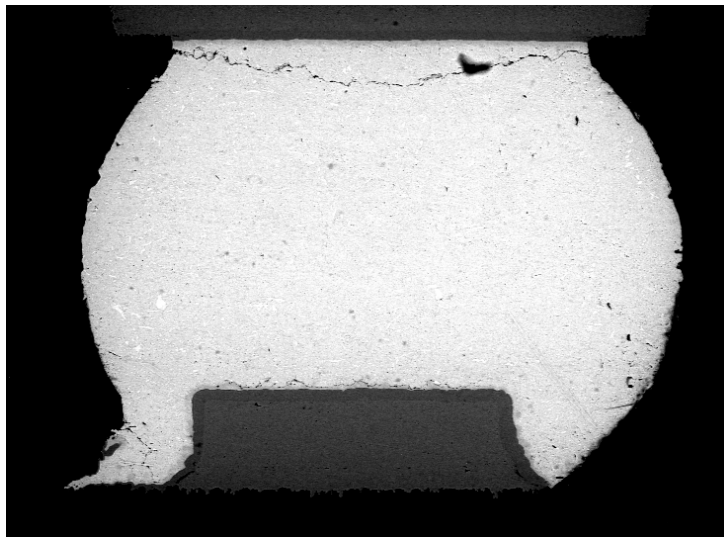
Cracks on the package side of the ball for Au pad finish board
